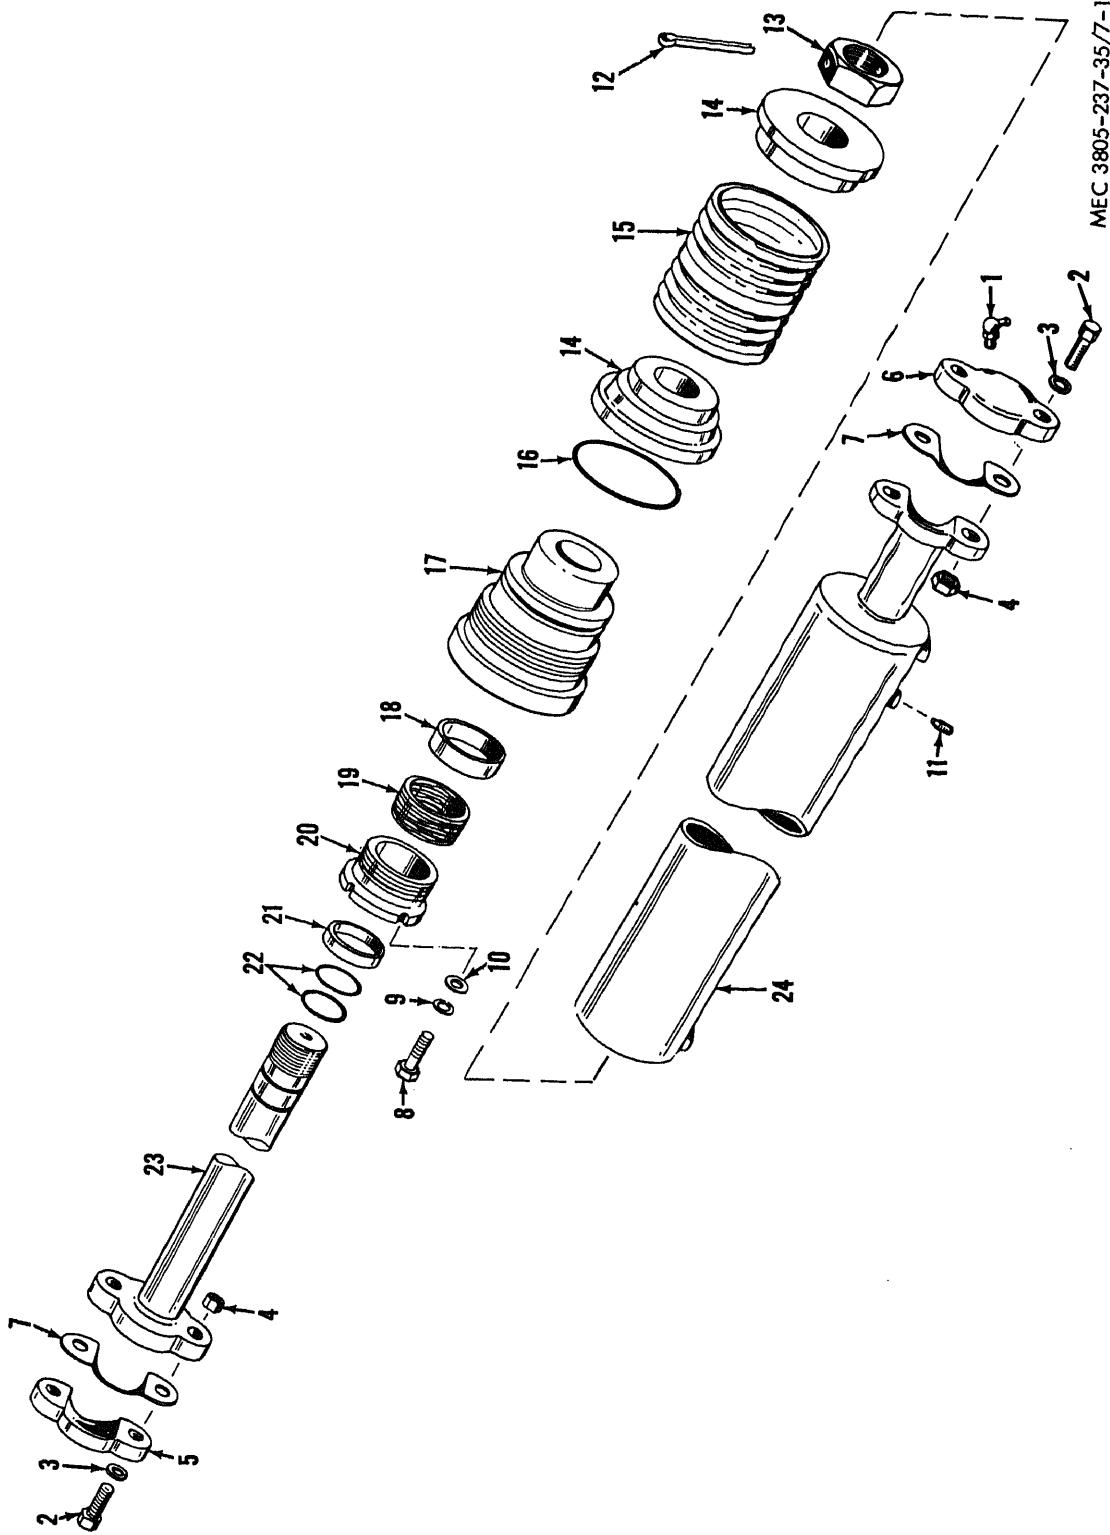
Moldboard hydraulic cylinder, exploded view.
